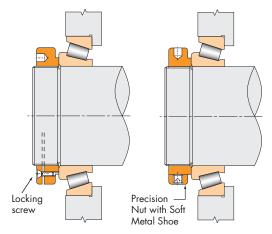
Setting devices using split nut and precision nut with soft metal shoe.
